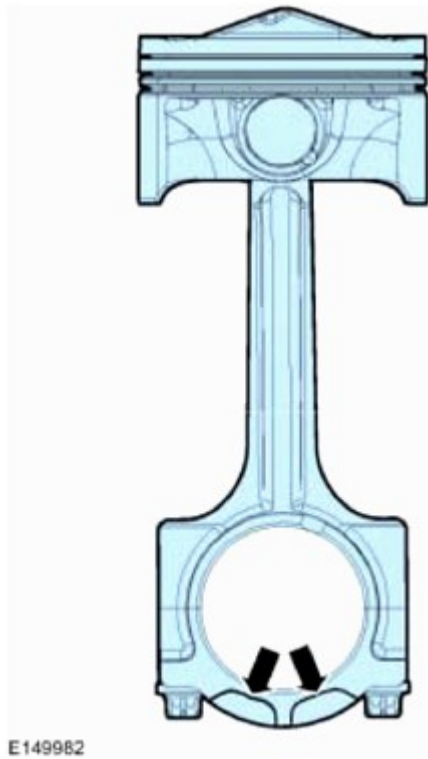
Identifying Connecting Rod Assembled With Front Marks Pointing To Front Of Engine
